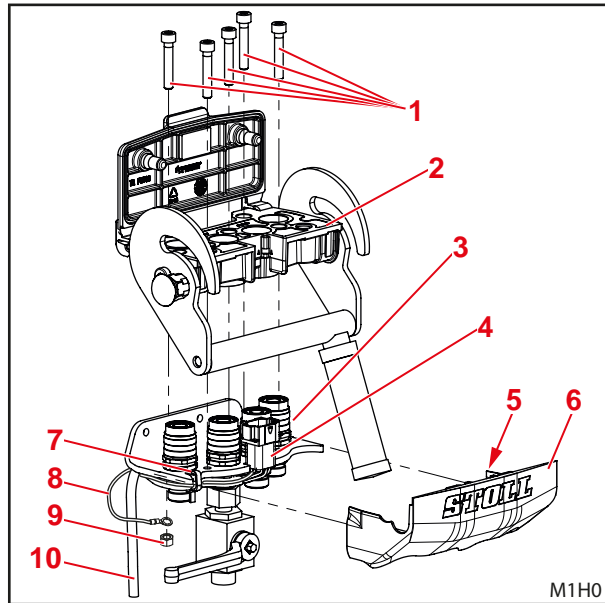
Installing the Hydro-Fix lower part with integrated electrical interface
